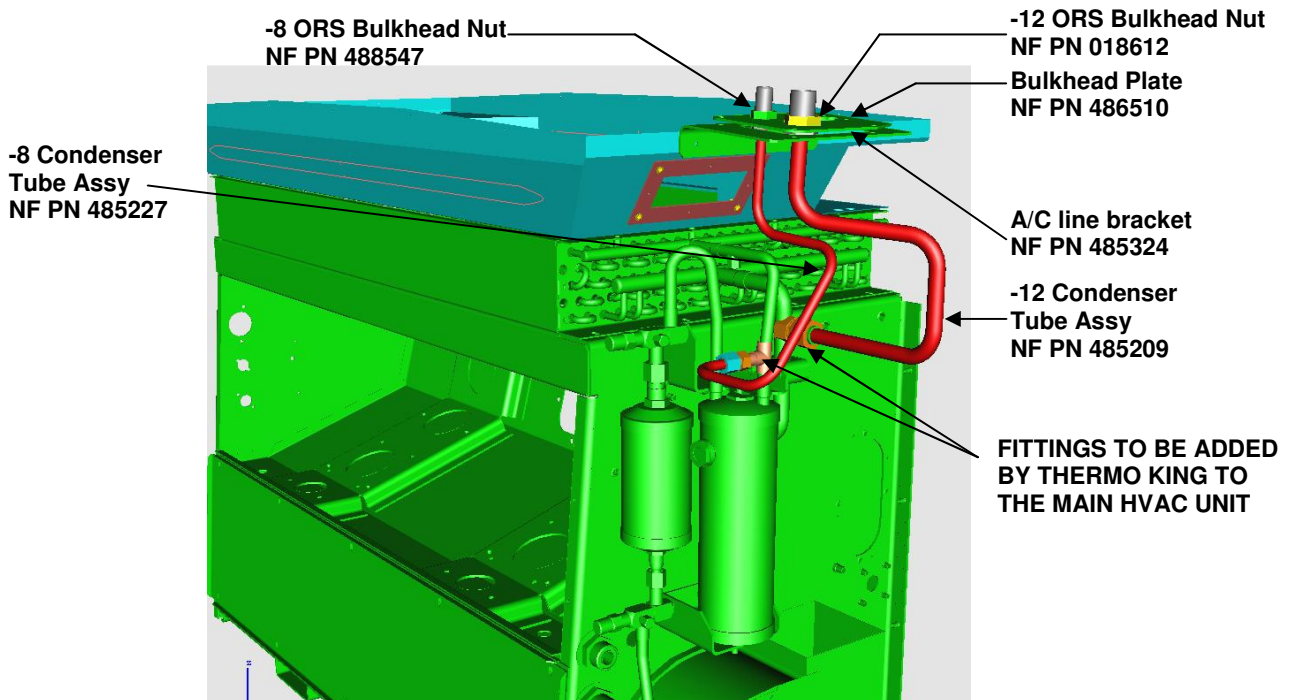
Rear AC Unit – Condenser Lines – Structure Removed for Clarity
